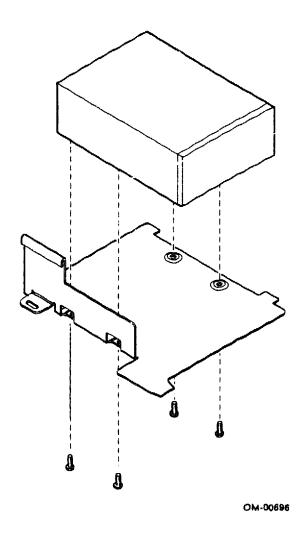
Removing a SCSI Device From a 3.5-Inch Mounting Tray
